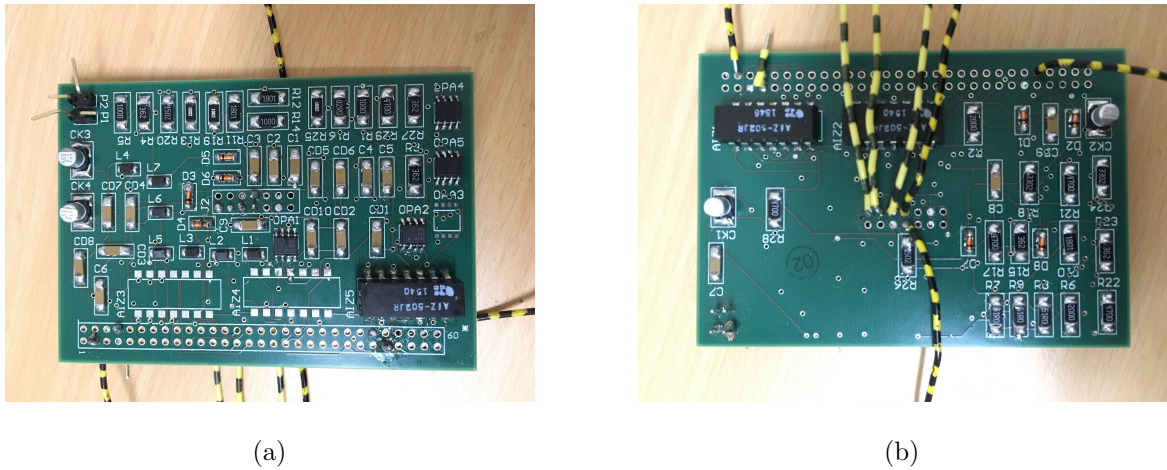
(a) The front side of the soldered PCB. (b) The back side of the soldered PCB.
